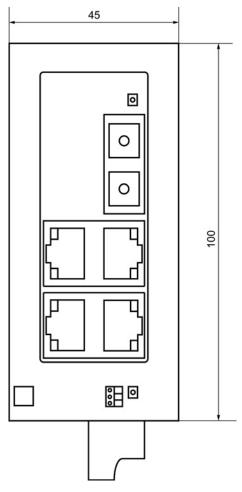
Dimension drawing, front view (example: SCALANCE XB004-1)
